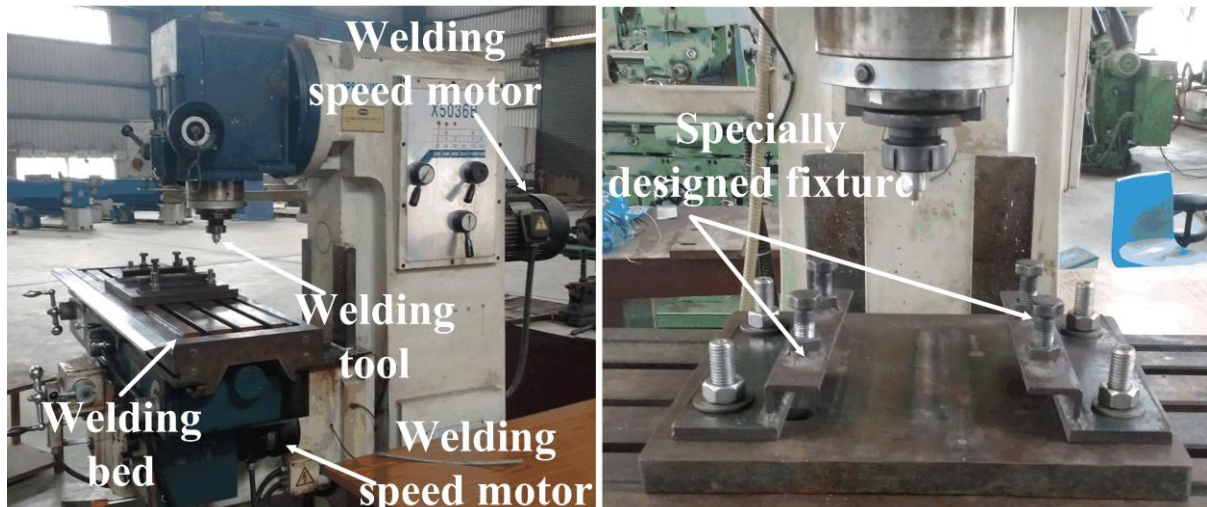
FSW machine with specially designed fixture and backing plate
